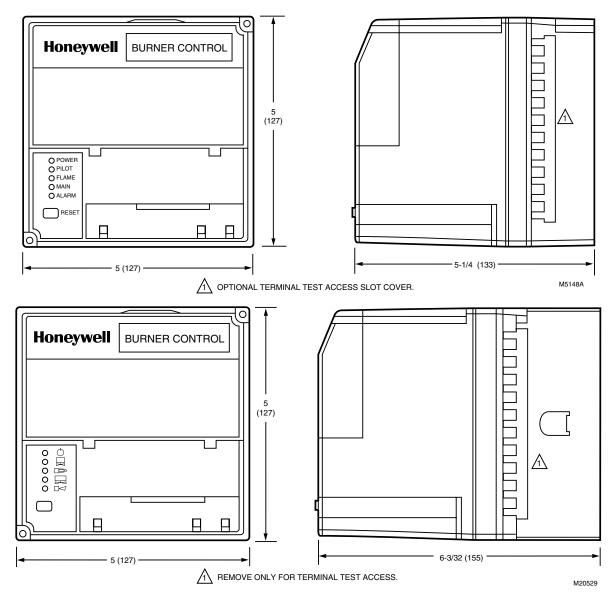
Mounting dimensions of RM7890 Relay Module and Q7800A Subbase (top) and EC7890 Relay Module and Q7800B Subbase (bottom) in in. (mm).
